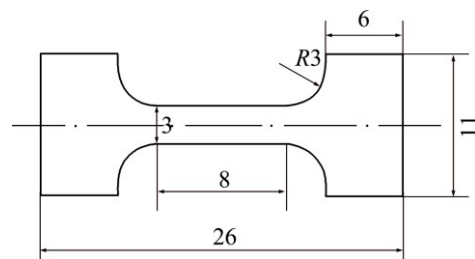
Dimensions of tensile test specimen (unit: mm)
